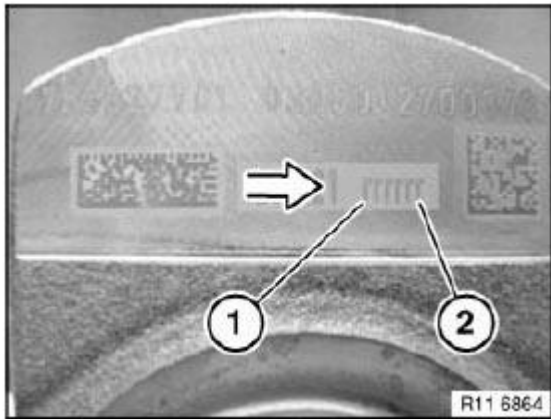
Identifying Connecting Rod And Connecting Rod Bearing Cap Color
